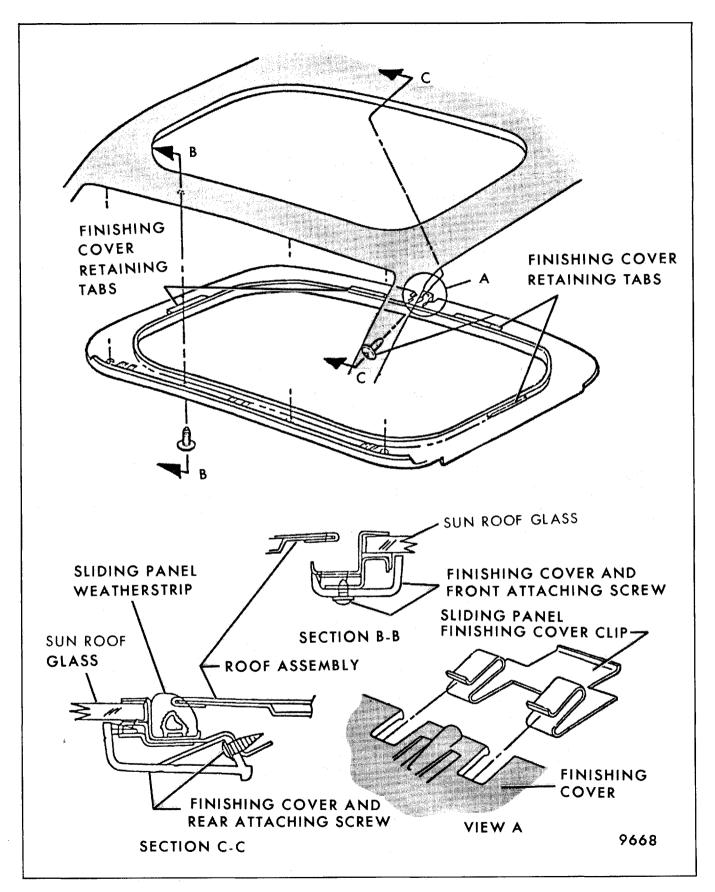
Sun Roof Sliding Glass Finishing Cover Installation
